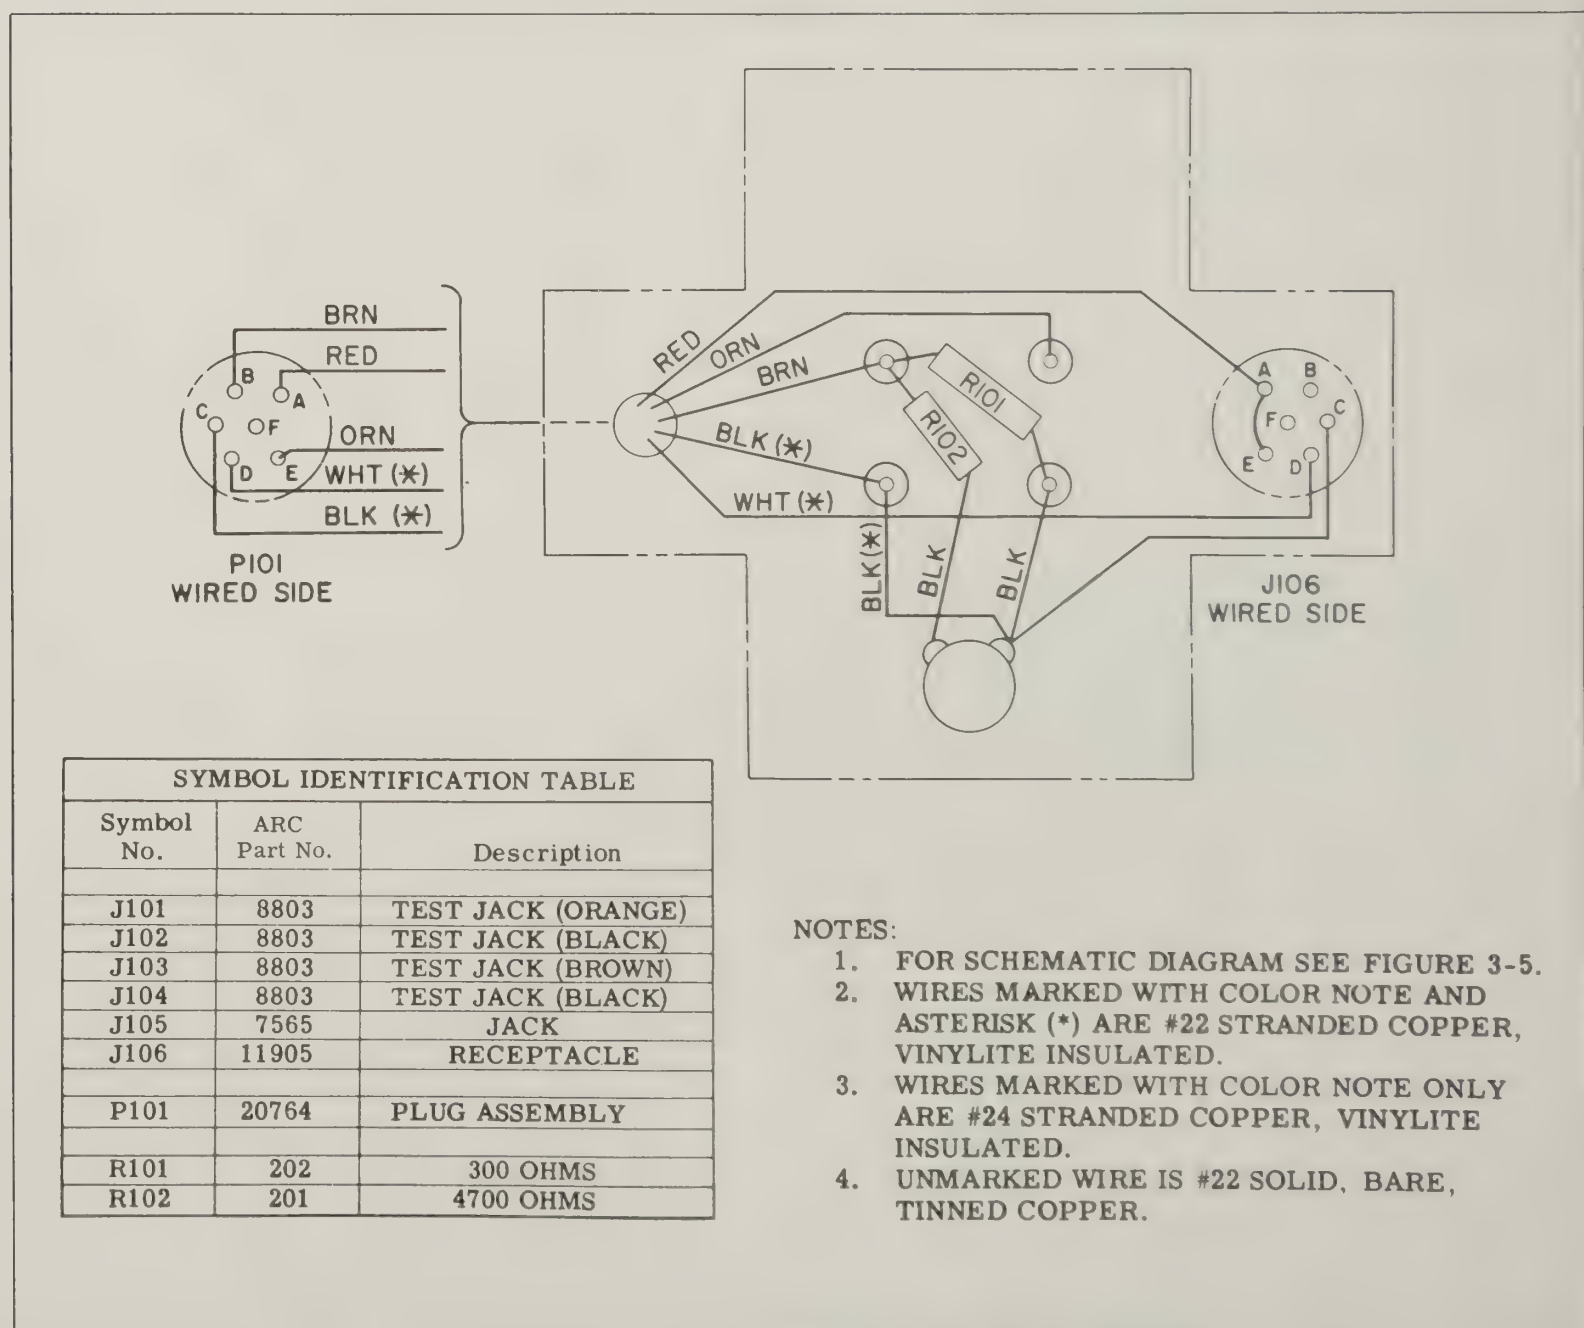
Cable Assembly ARC-20689, Wiring Diagram
